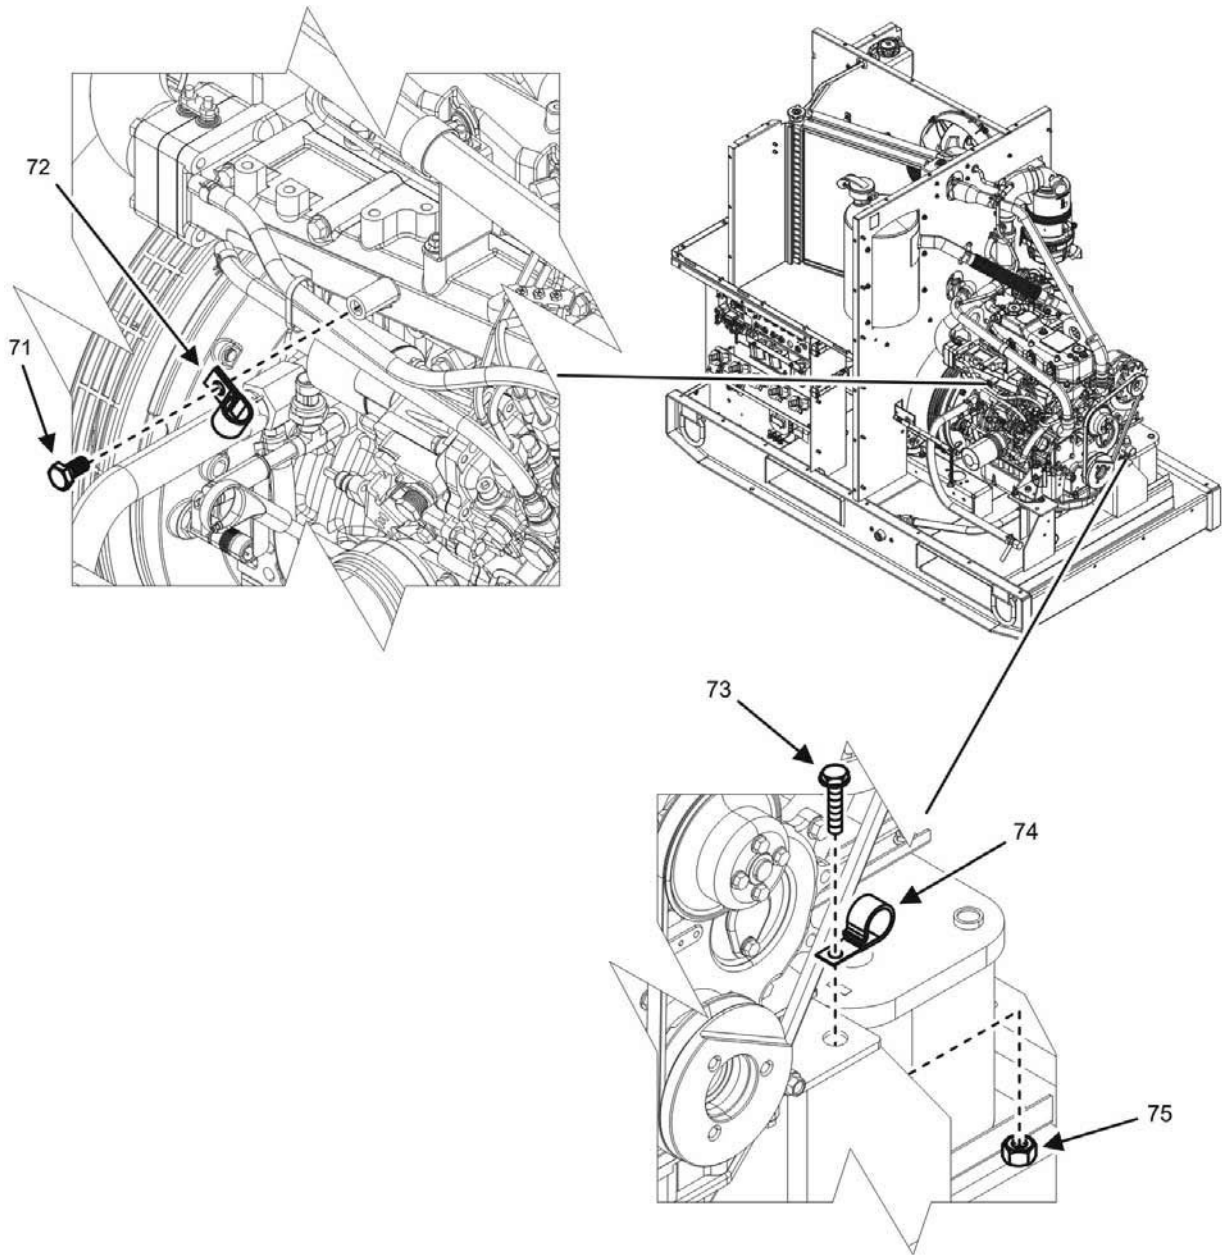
Engine Wiring Harness (Sheet 12 of 14).
